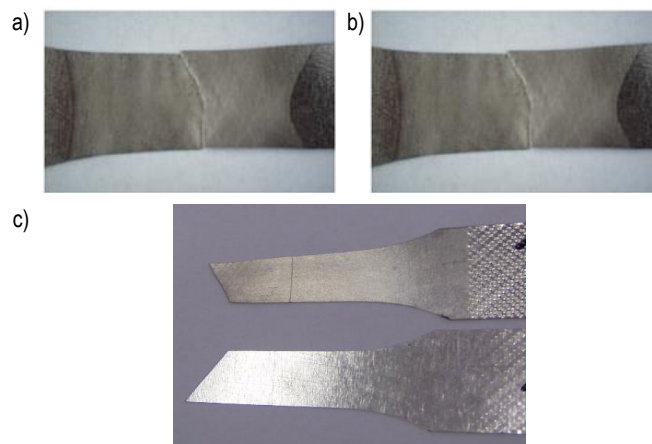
Detail of plastic undeformed parts of specimen after uniaxial tension test: a) local deformation with a fracture, b) local deformation without a fracture, c) fractured material after plastic deformation and without plastic deformation
